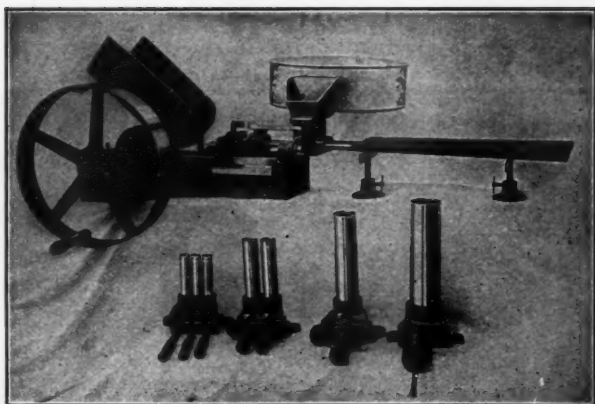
ACME PLUNGER FEED CORE MACHINE.
